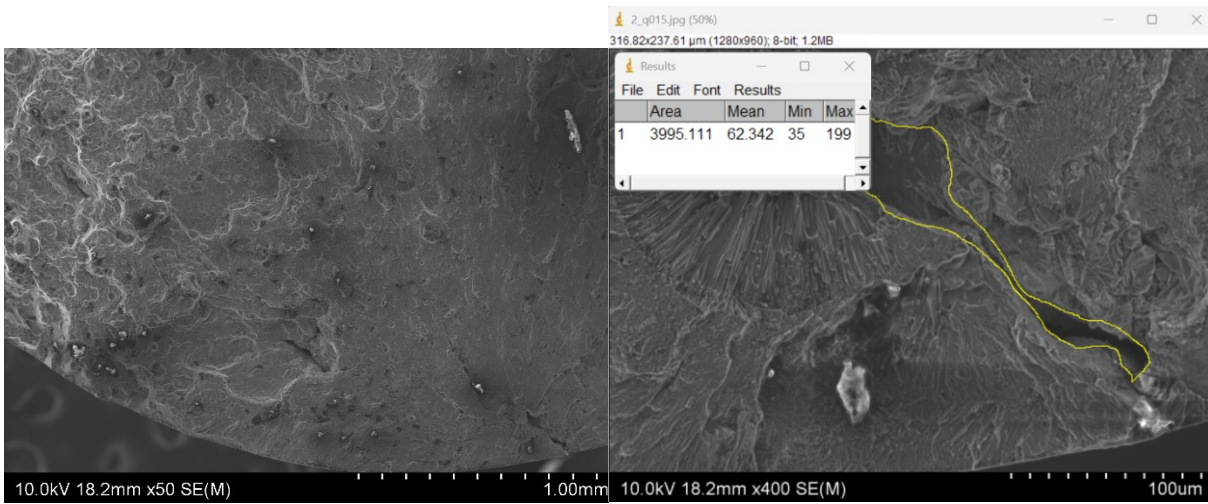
Fracture surface of sample CD//BD-AB-3 a) x50, b) x400.
